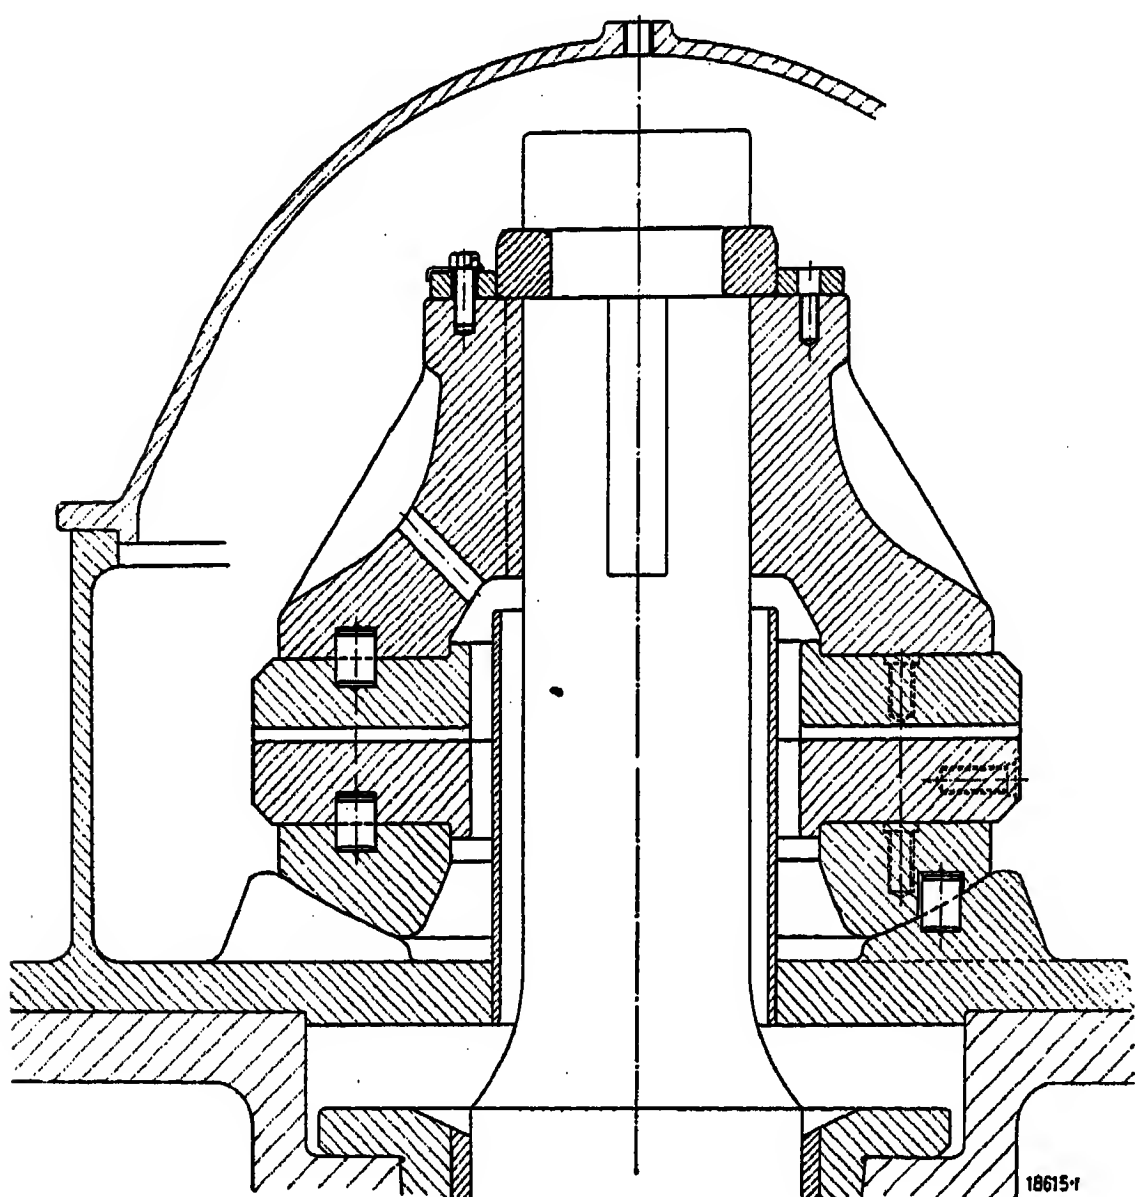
Section through a thrust bearing, 40 tons bearing pressure, 94 r. p. m.
